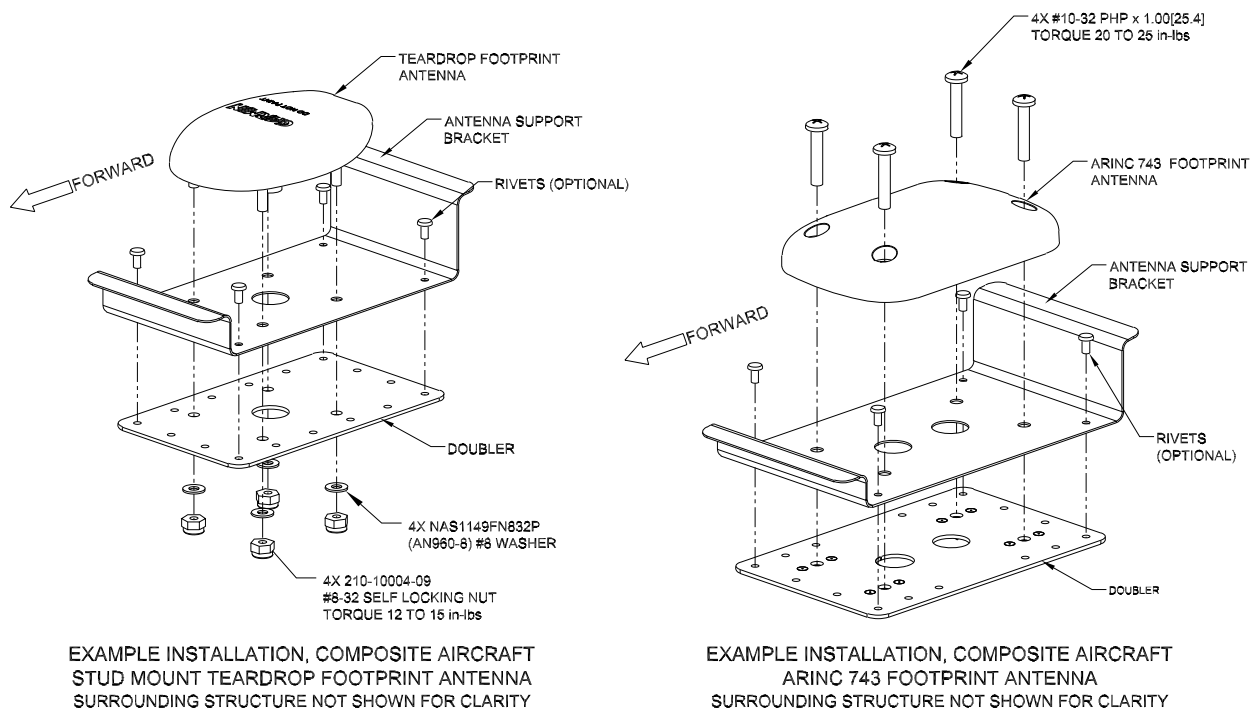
Example Bracket Antenna Mounting Under Glareshield
